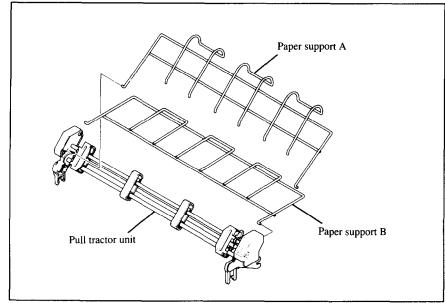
Mount the paper support A and B onto the Pull Tractor Unit.
